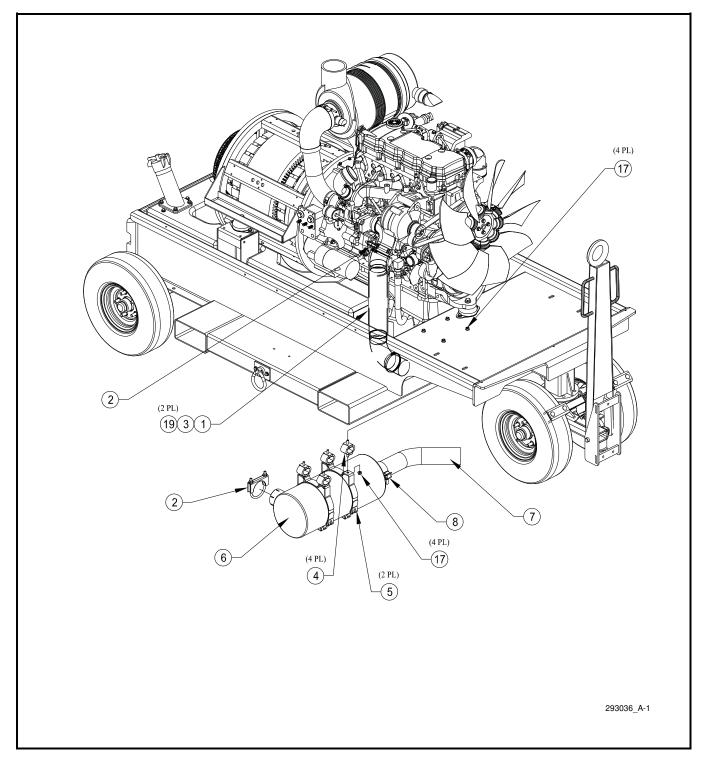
Radiator/Exhaust Installation (Sheet 1 of 3).
